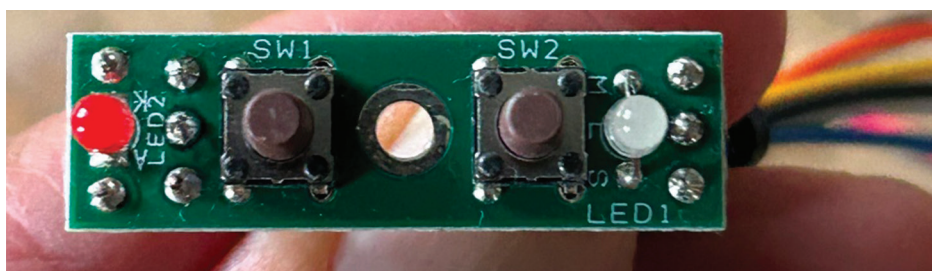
The small keyboard switch assembly which requires mounting on a speaker chassis or transceiver front or rear panel.
